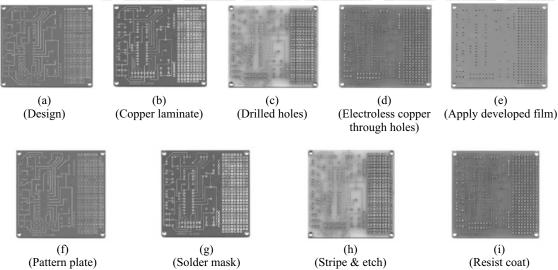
(a)-(i) Process of PCB manufacture.
